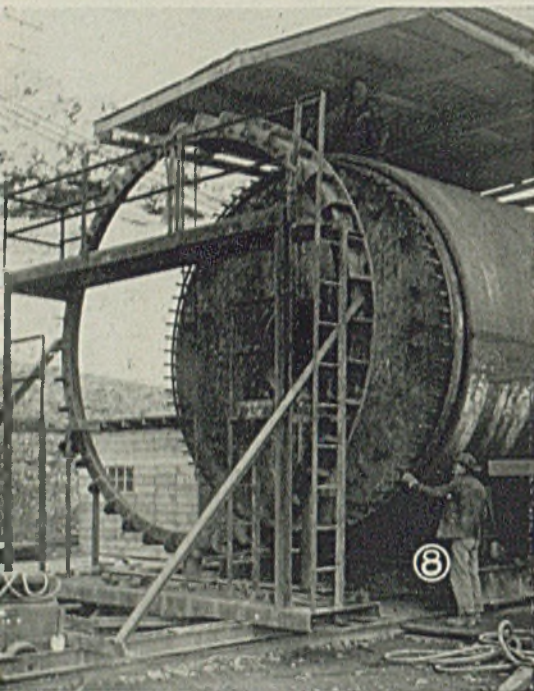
X-ray machine rides on rails parallel to penstock production line. Every inch of penstock welding must pass radiographic examination
